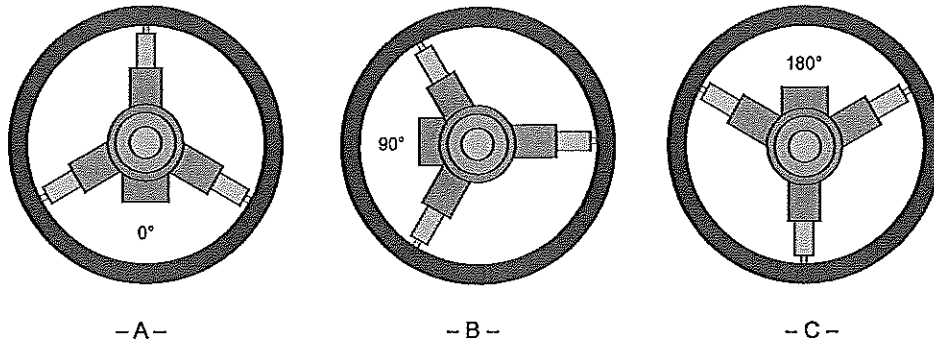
Bore Gauge Measurement Positions within the Mold Bore
